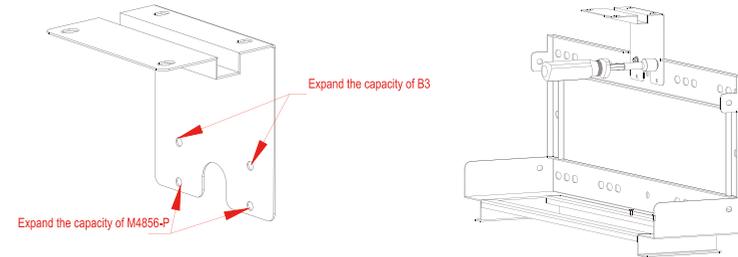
Fix the Wall Bracket and the Expansion Bracket
